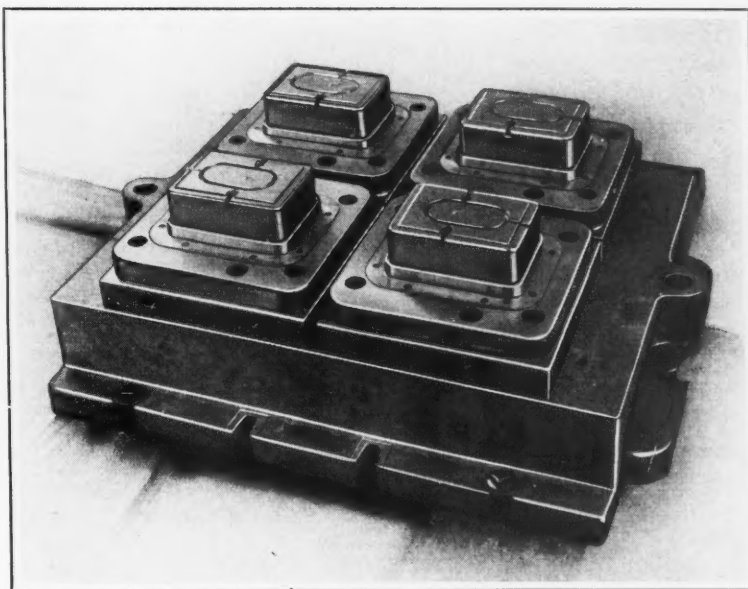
Upper Forming Member for Mold Shown in Fig. 2
